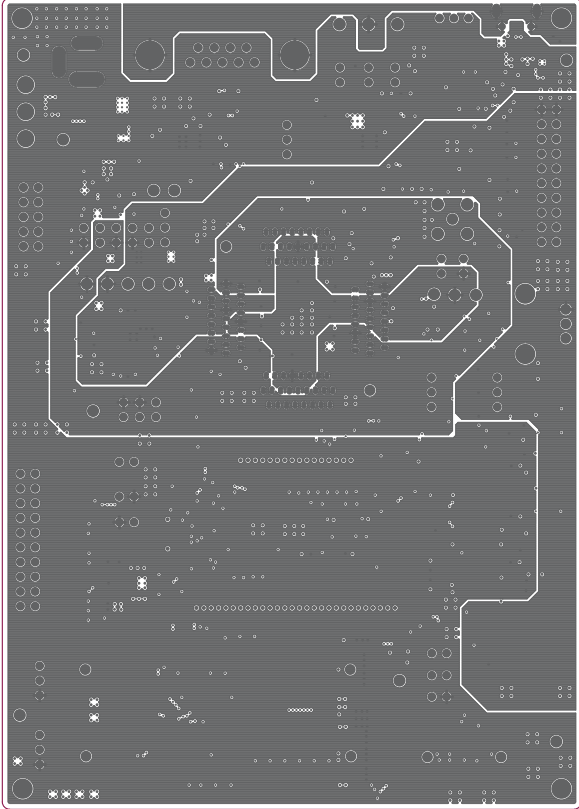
ATSAM4C-EK Layout: Bottom Layer
